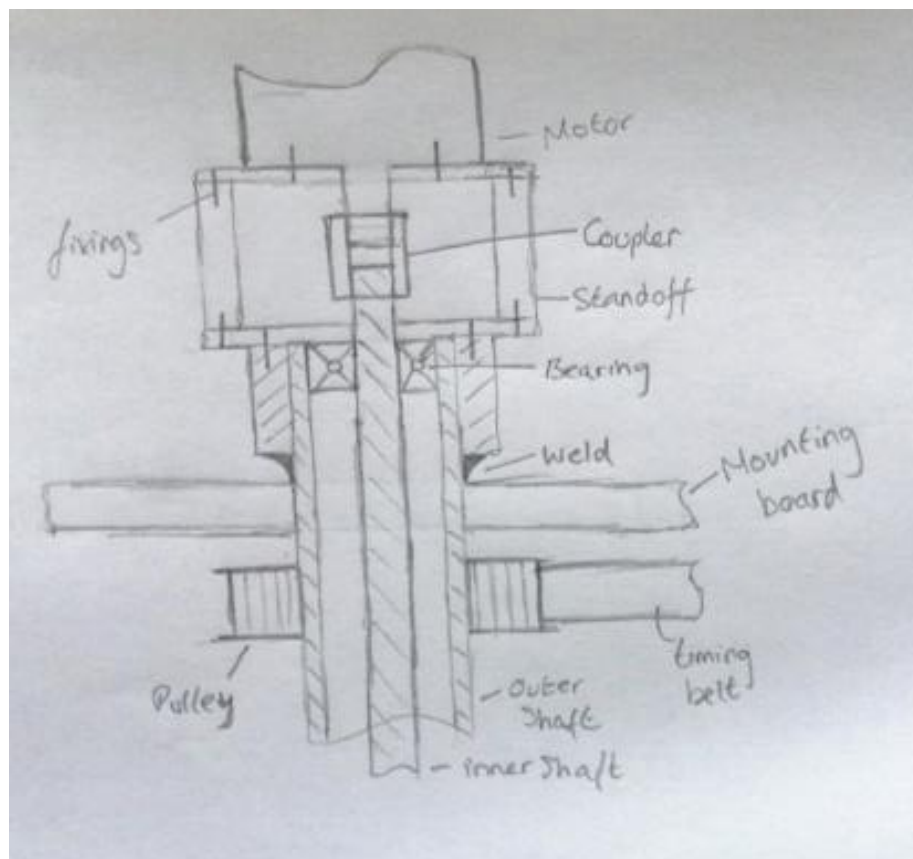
Initial sketch fixing stepper motor to outer shaft
